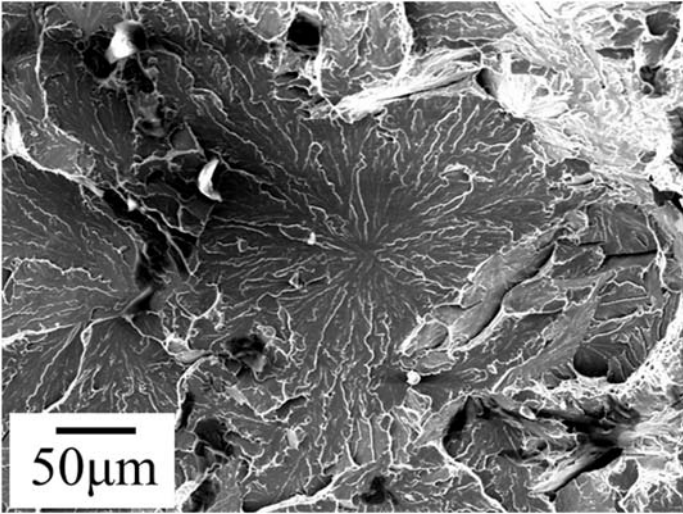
Fracture surface around fracture initiation site (Steel L).
